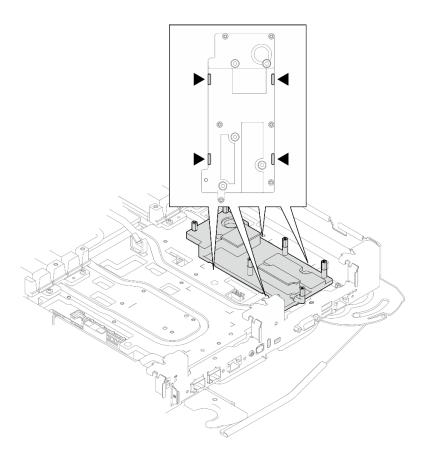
Locations of openings on the bottom side of the ConnectX-8 riser assembly interface plate
